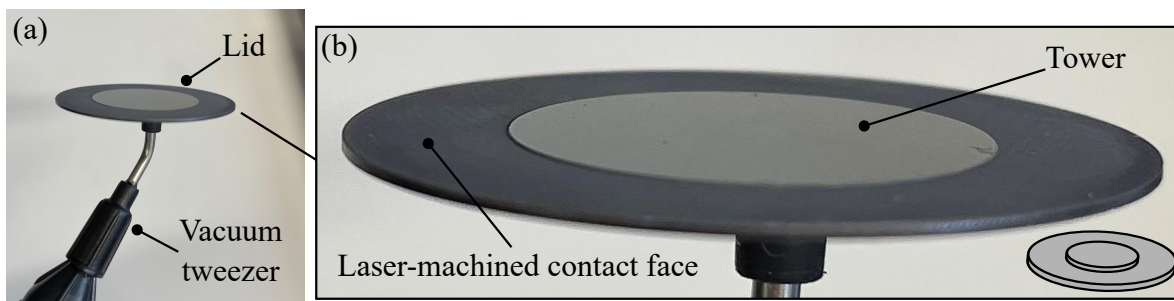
As-fabricated Si lid produced by femtosecond-laser through-cutting and depth-controlled pocket milling. (a) Lid manipulated using a vacuum tweezer, enabling handling without contacting the outer edge. (b) Close-up view showing the raised central locating tower (radius 8.5 mm) and the laser-machined contact face (outer radius 15 mm) that interfaces with the blade during etching (see inset for orientation). The tower step height was verified by white-light interferometry ($\approx 180\ \mu\text{m}$).
